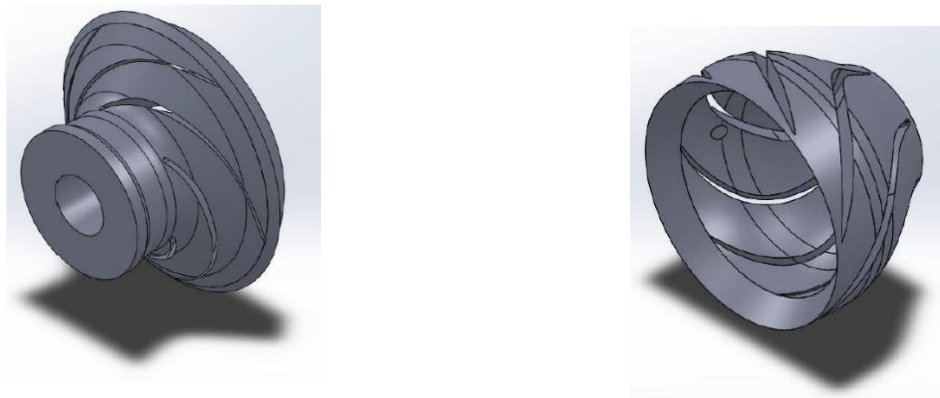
Simplified CAD model of impeller (Balance holes neglected) (left) and diffuser (right). [12].
